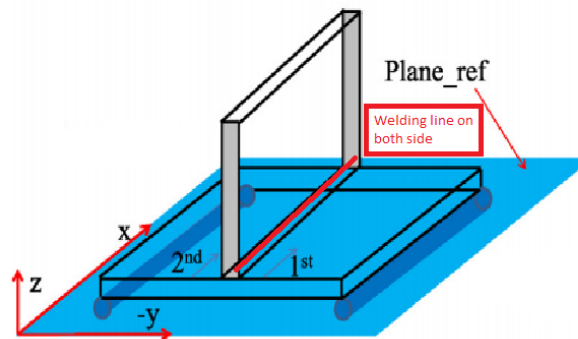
Welding coordinate system and welding lines of the fillet welding used in the article. Source: [32]
